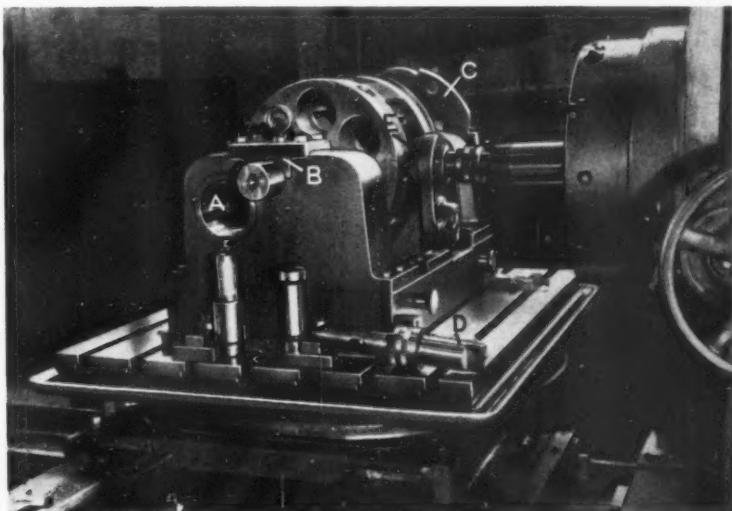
Set Up on a Collet & Engelhard Horizontal Borer for Machining the Locator Pad Holes in a Spindle Drum. The Same Indexing Fixture is Used for Boring the Spindle Holes
